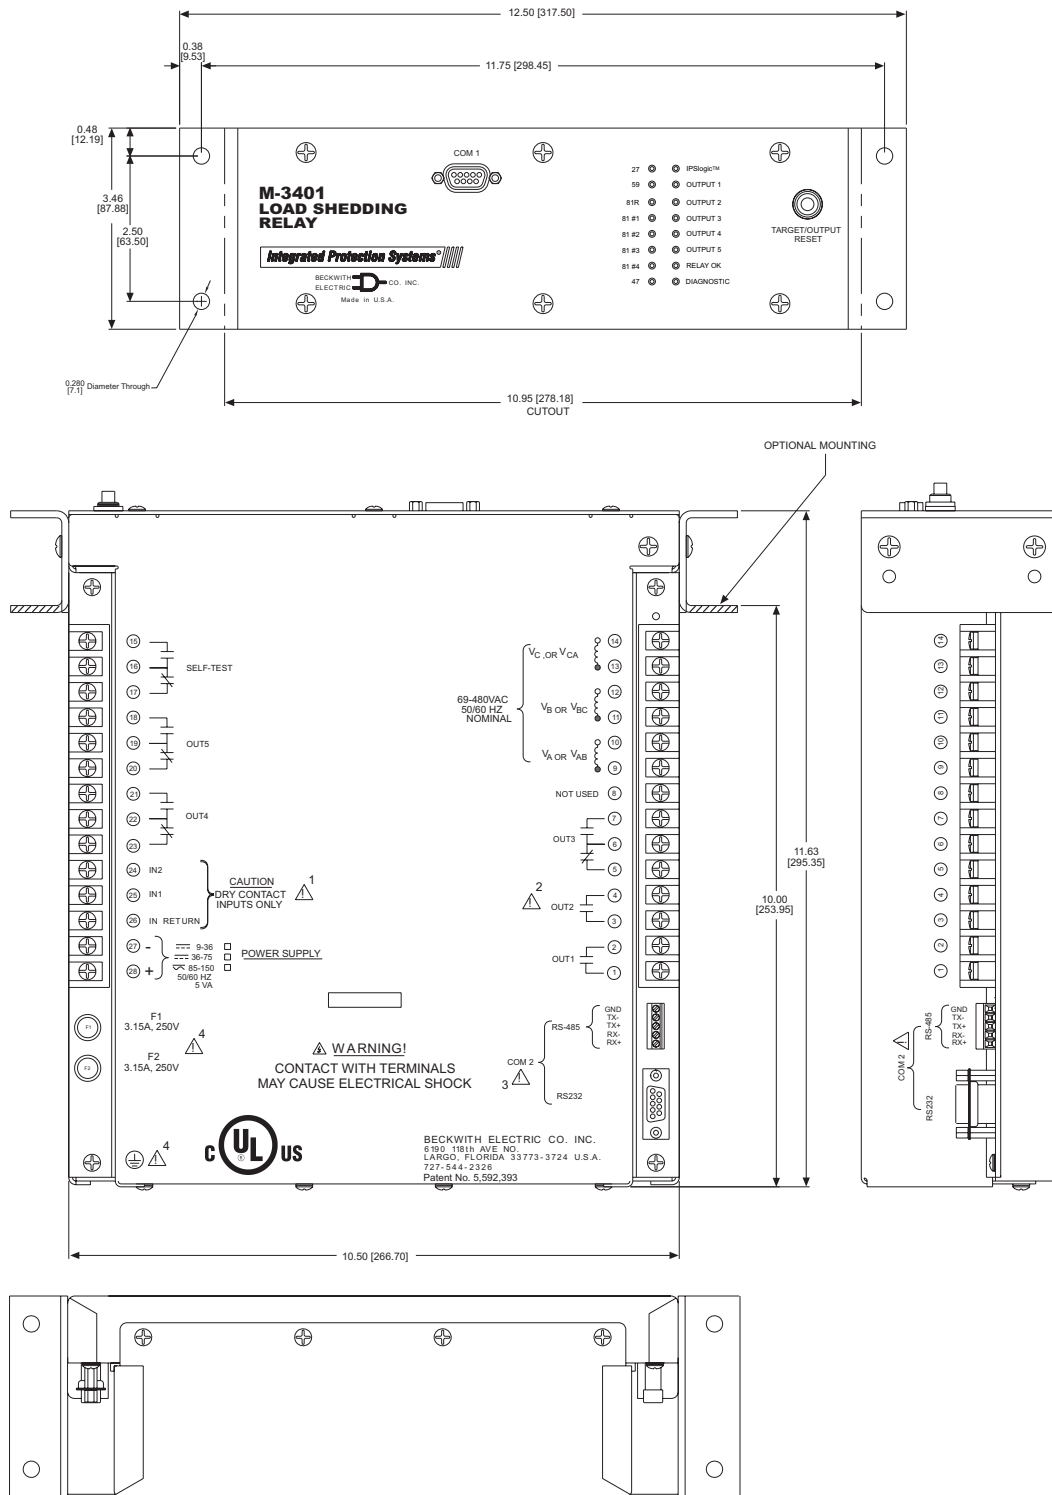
Optional Horizontal/Vertical Panel Mounting Dimensions
